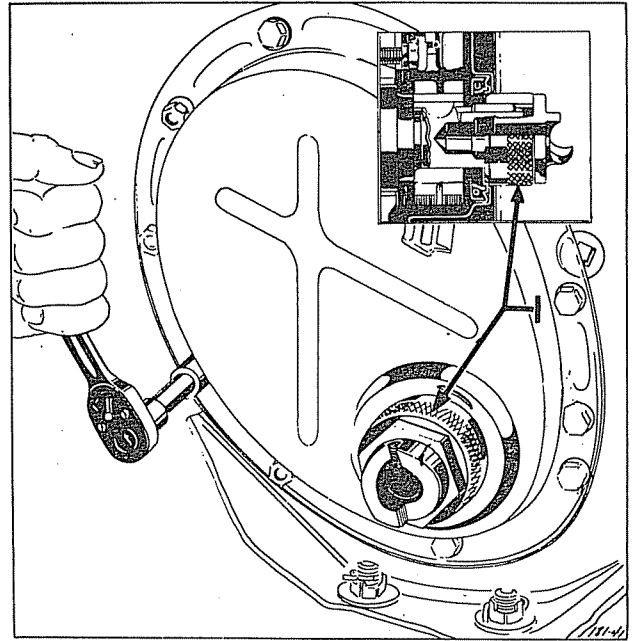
Chain Case Cover Oil Seal Centering Tool.
